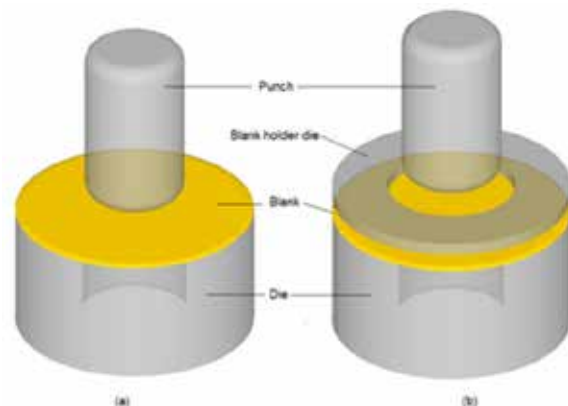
Two deep drawing models: (a) without blank holding die and (b) with blank holding die.
